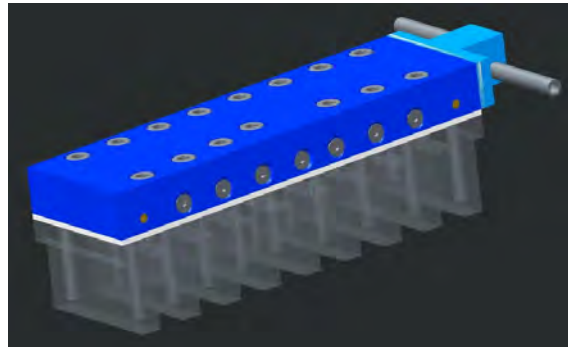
CAD design of a linear motor cooled with spot evaporators [78]
